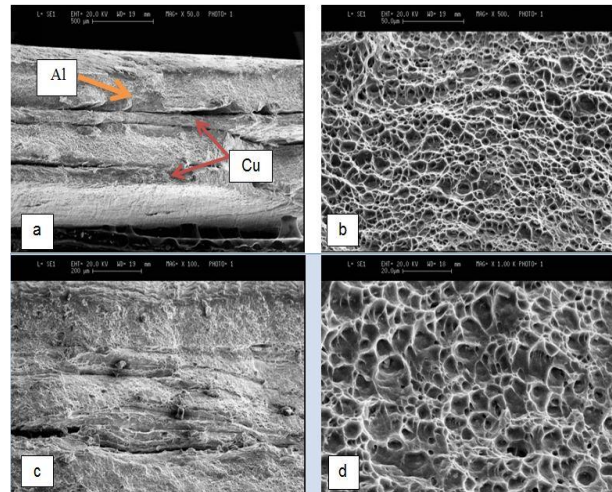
Tensile fracture surfaces of Al/Cu composite in different passes of APB process: (a, b) 1th (c, d) 3th pass.
